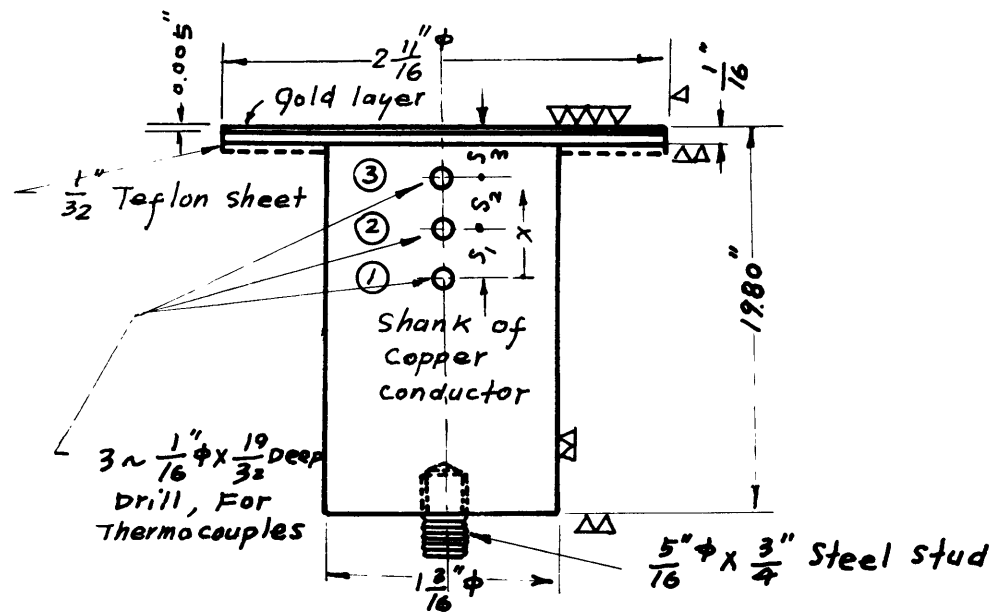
Detail of Heating Surface and Heat Conductor Shank
